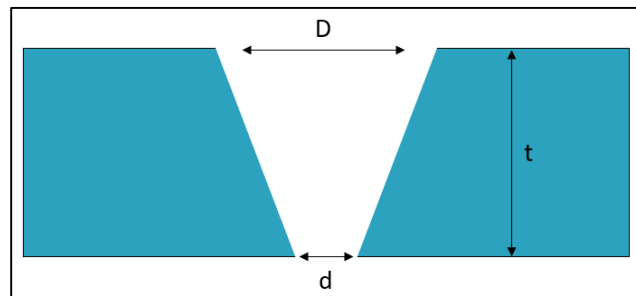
Schematic illustration of a hole profile and taper dimensions.
